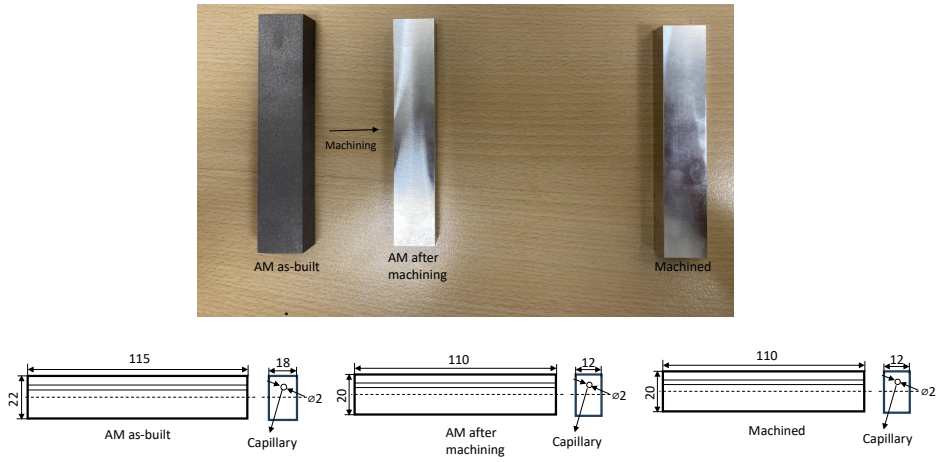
The traditionally machined Aluminium 6082-T651 specimens and additively manufactures AlSi10Mg specimens
